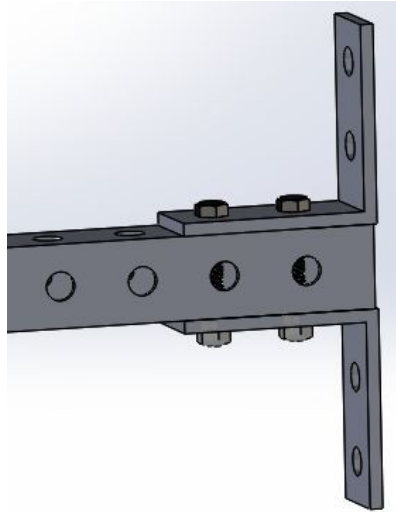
Corner L-Brackets Bolted to Steel Tube
